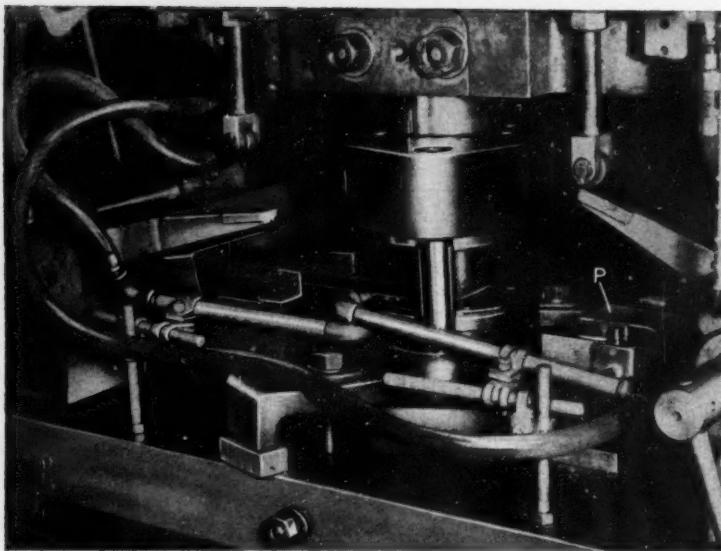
Close-up View of the Compound Tool, Fig. 13, Set up on a Bliss No. 21 B Press, Equipped with a Double Roll-feed Mechanism, and Pneumatic Counterbalance for the Ram
